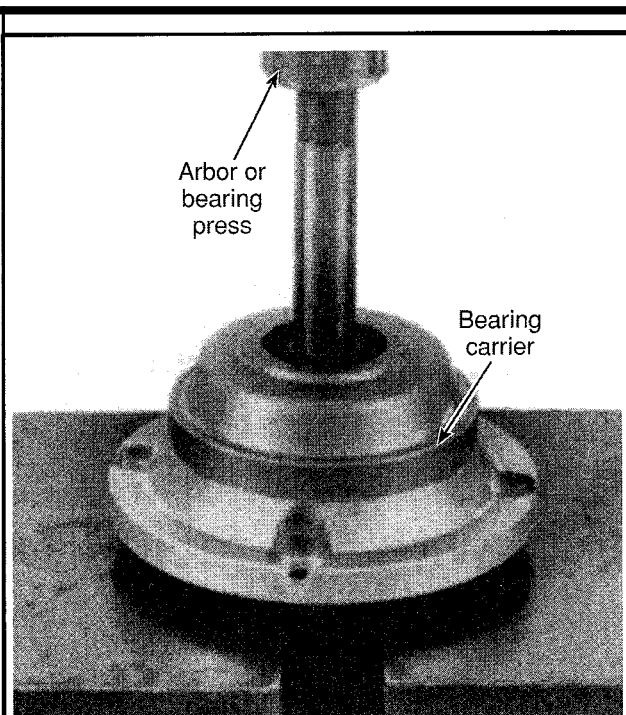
After heating, use a shop press to separate the driveshaft from the carrier
